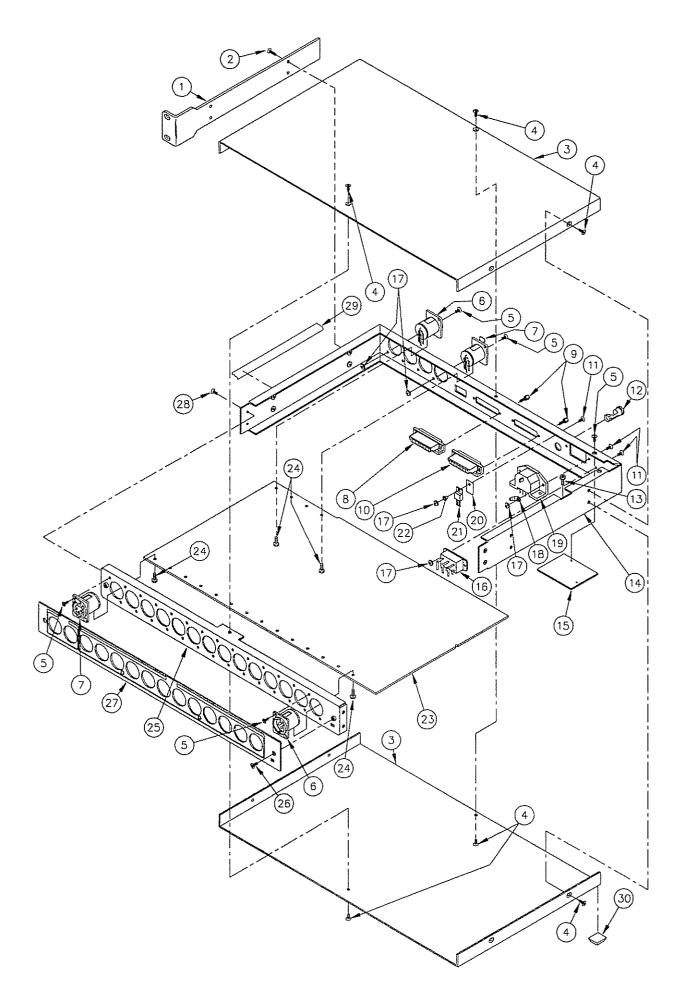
SWR-122 SWITCHER ASSEMBLY
